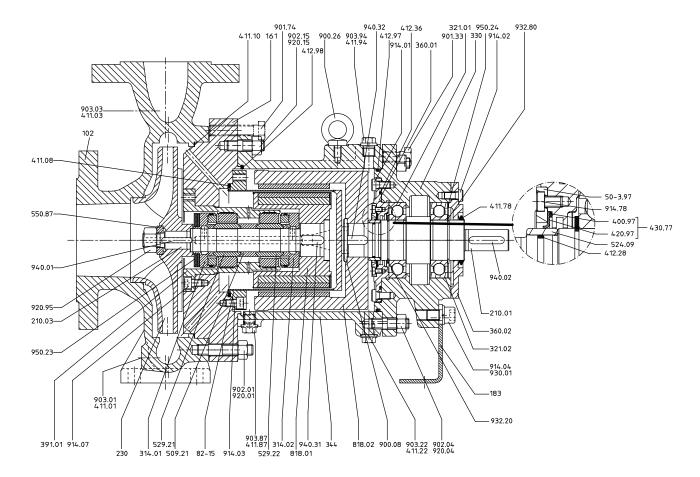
General assembly drawing of Magnochem with leakage barrier
